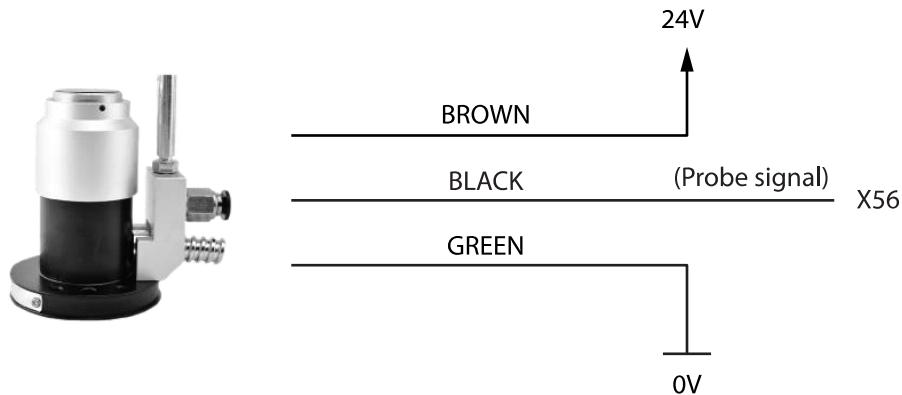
Tool length sensor wiring diagram (3 wires type)
